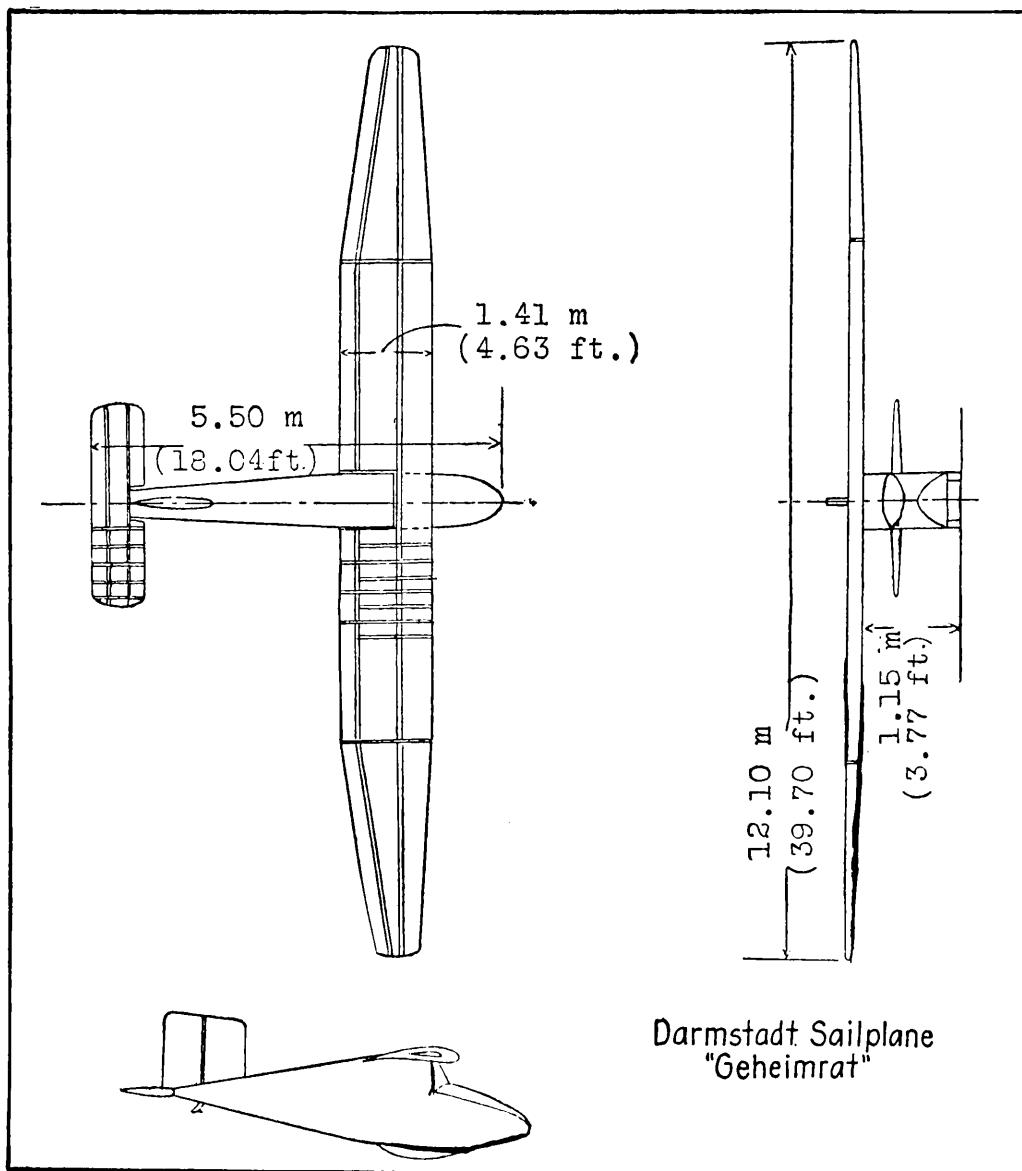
Outline Drawings Showing Layout of the Darmstadt Sailplane "Geheimrat."
